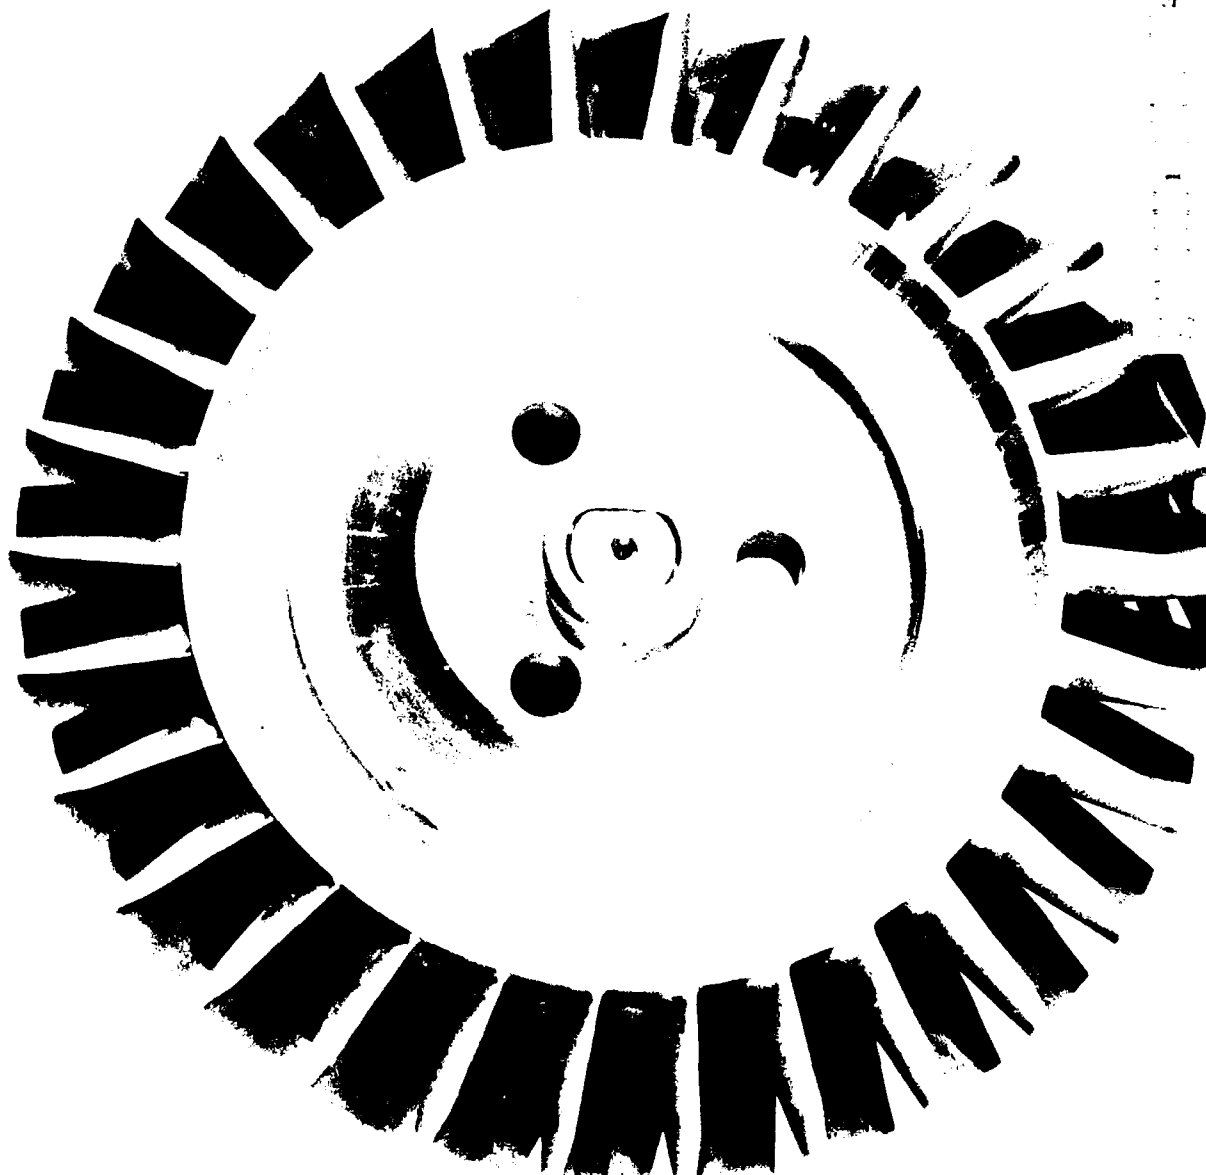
INTEGRALLY MACHINED TURBINE STAGE
